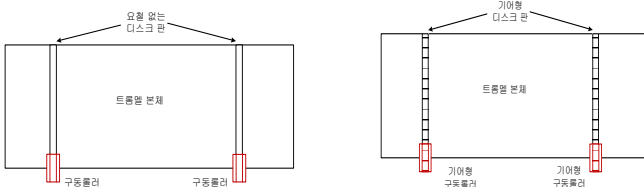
Driver roller (left: disc plate type / right: gear type)
